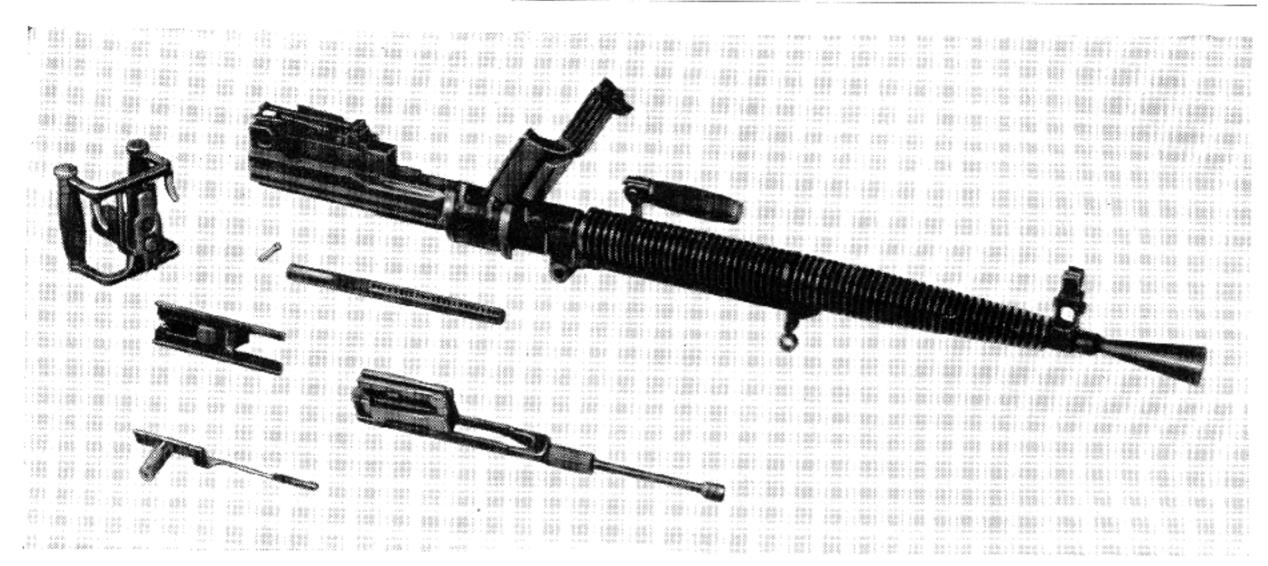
Stripping the DS, continued: operating slide and belt group have been removed together. The next step is the removal of the handle from its guideway.
